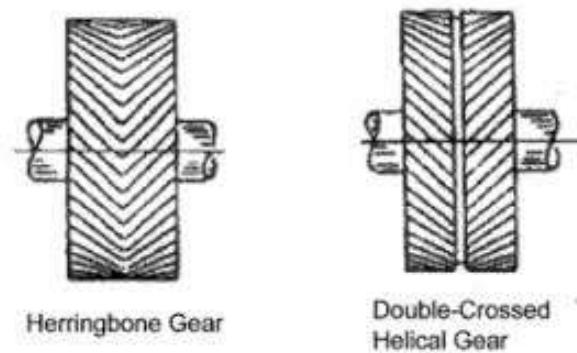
SHOWING A SET OF HELICAL GEARS.
